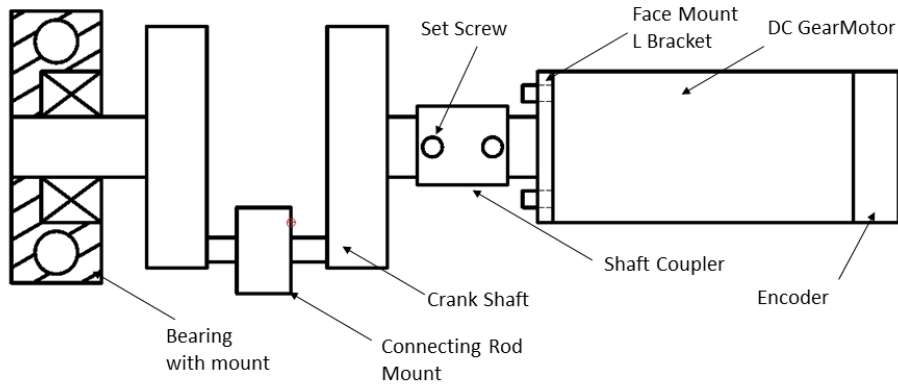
Linkage Top View - Motor Crankshaft Assembly
